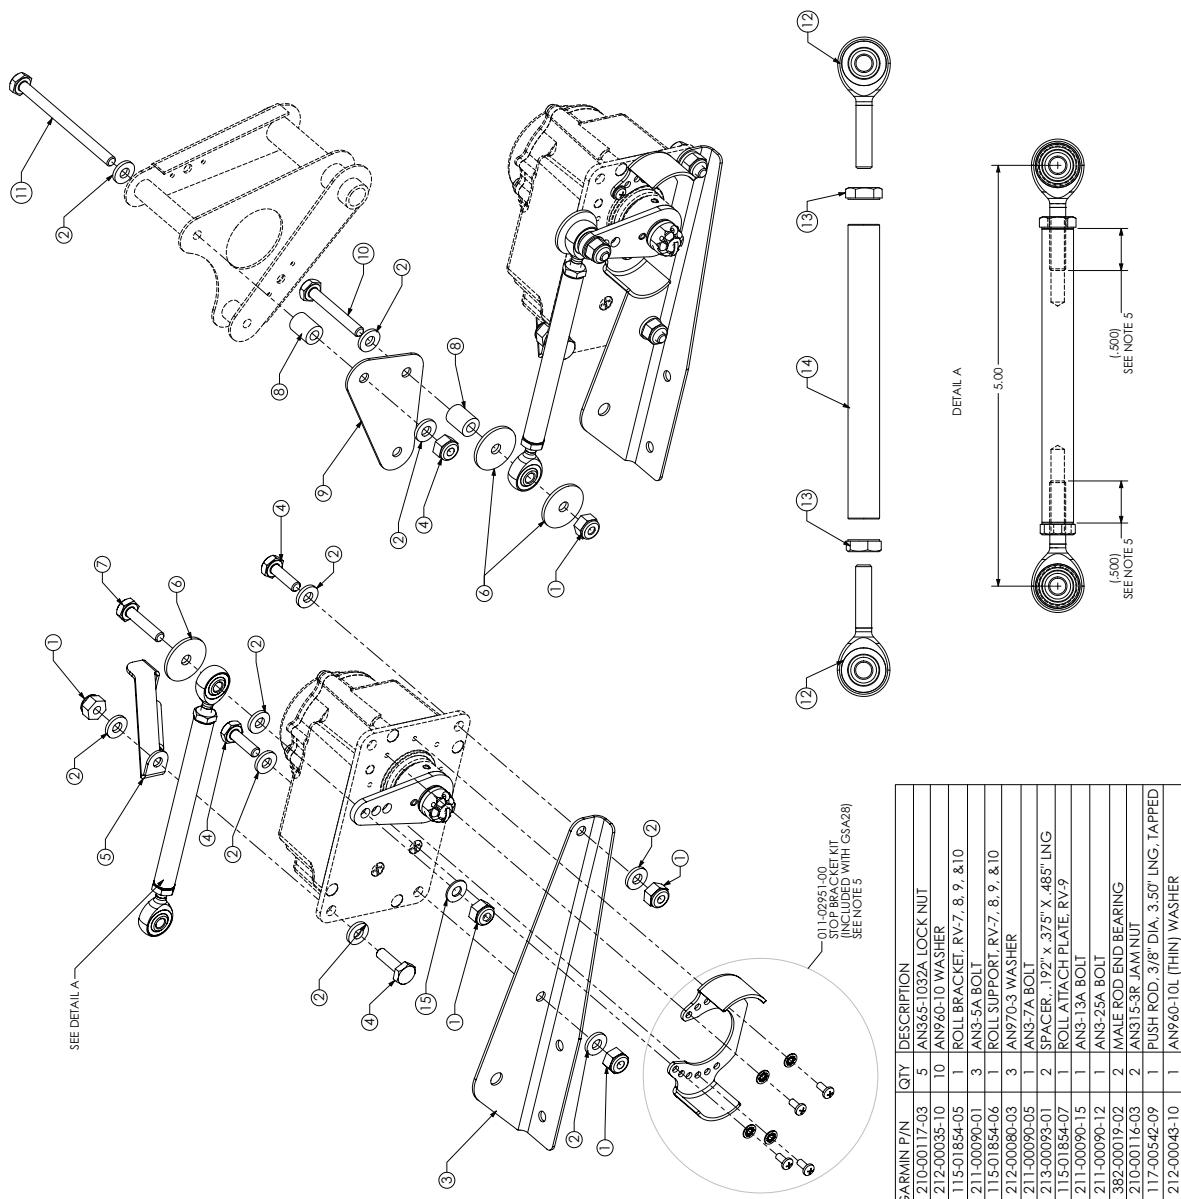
GSA 28 RV-9 Roll Mounting Kit 011-02952-13 (page 1 of 2)
